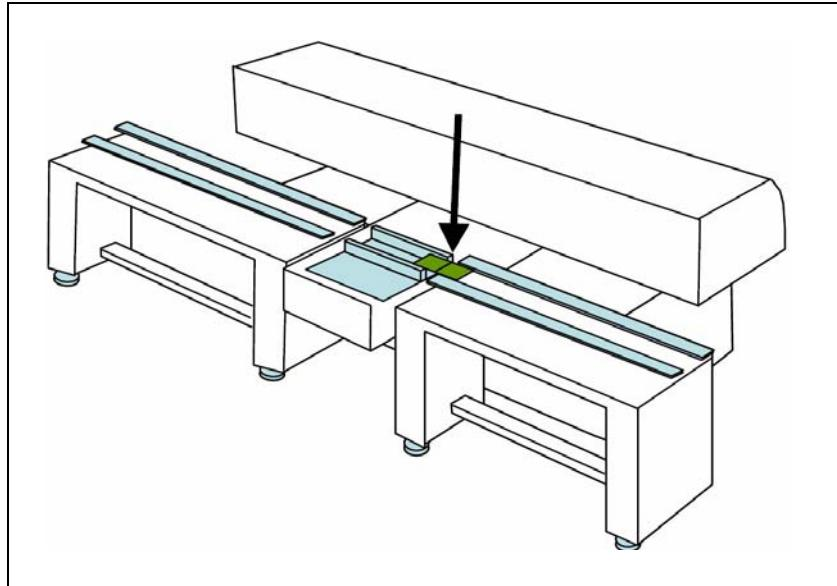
Double-check alignment between upstream conveyor fixed rail and T conveyor fixed rail.
